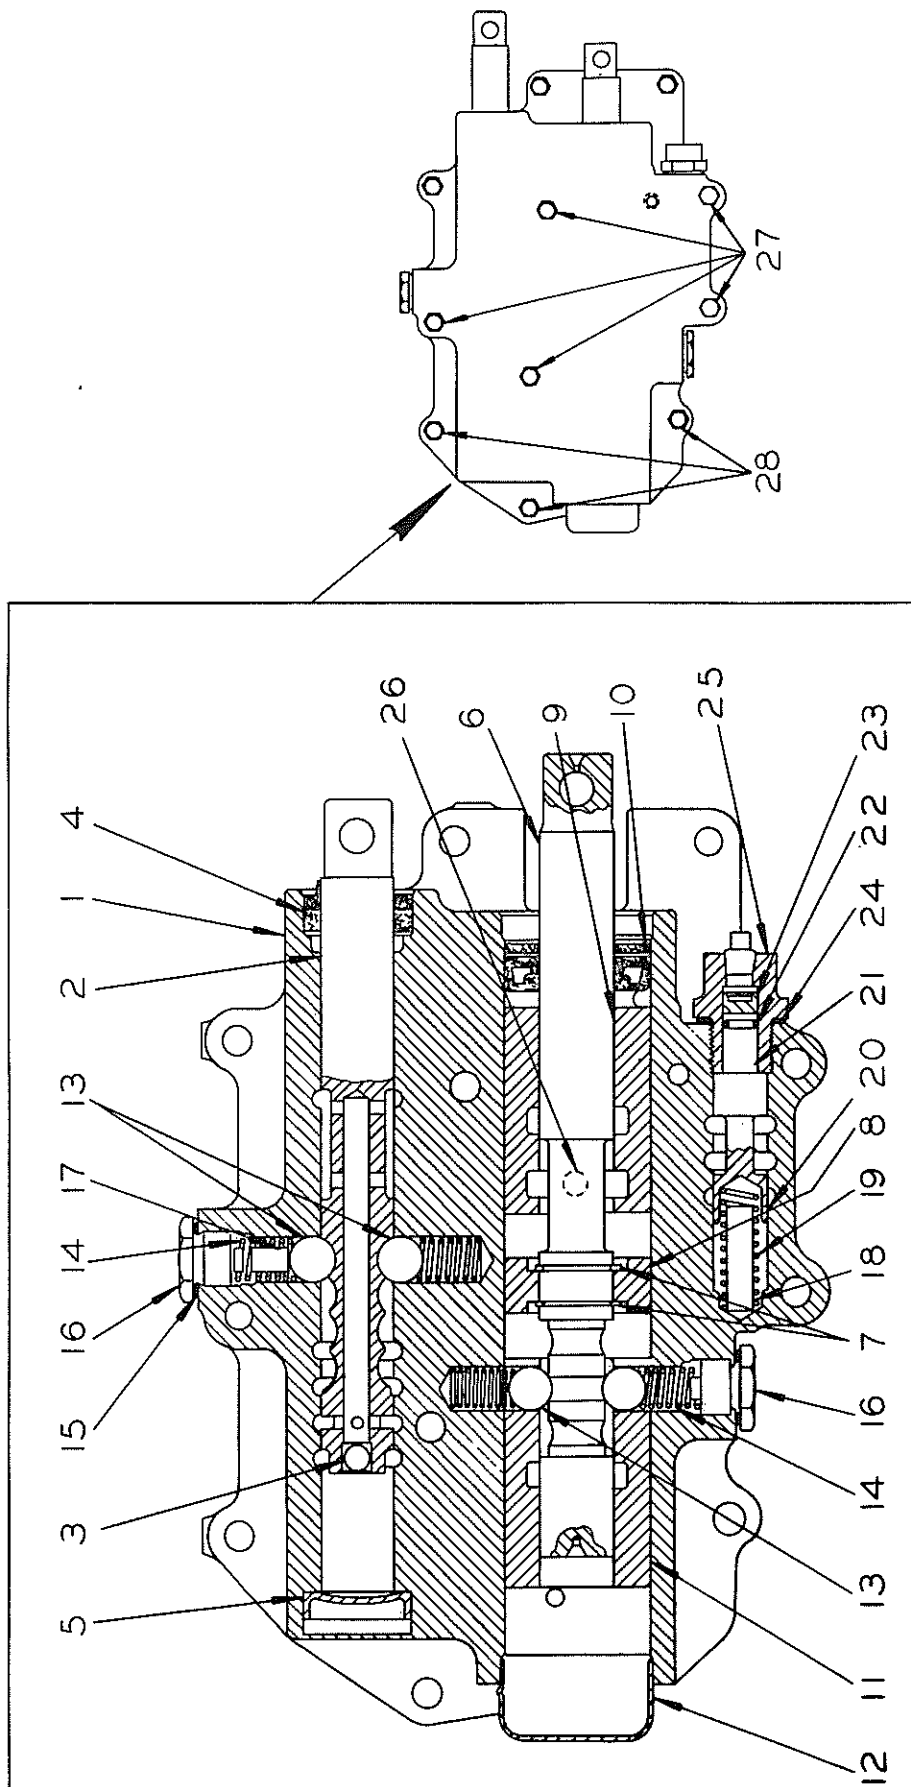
TRANSMISSION SELECTOR VALVE ASSEMBLY
